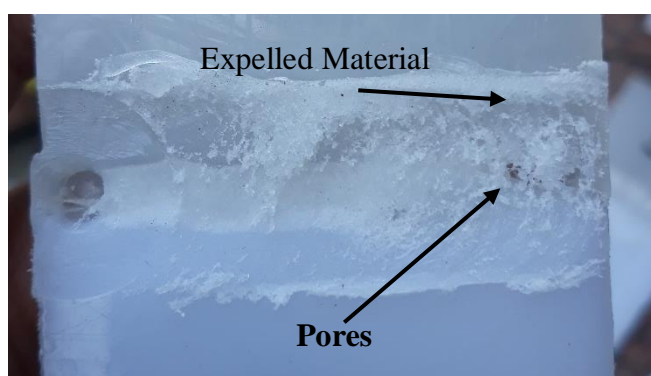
(a) FSW welded specimen with more pores and expelled material
